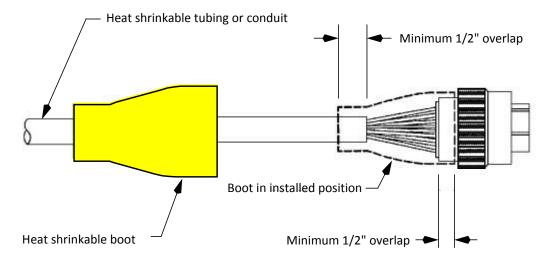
Termination of Encapsulation Tubing or Conduit at Connectors
